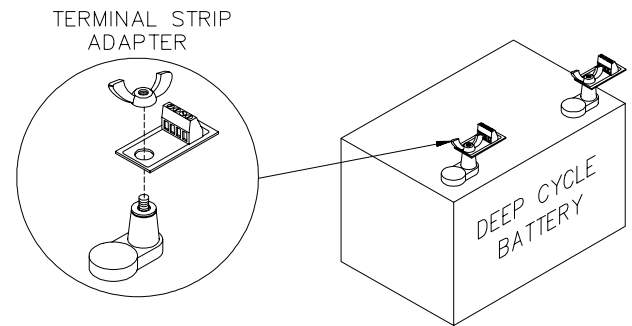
Terminal Strip Adapters for Connections to Battery
